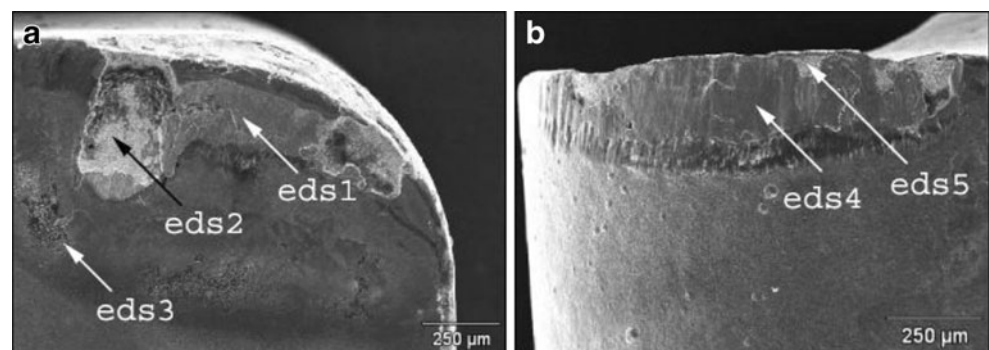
Tool rake and flank faces: $v_c=570$ m/min with conventional cooling
